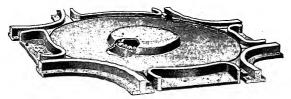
TYPE "A" BALL-BEARING TURN-TABLE.
